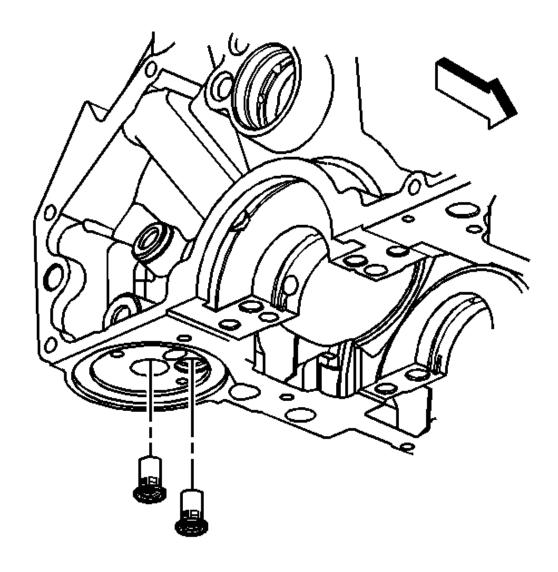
View Of Oil Filter Bypass Valves Courtesy of GENERAL MOTORS CORP.
